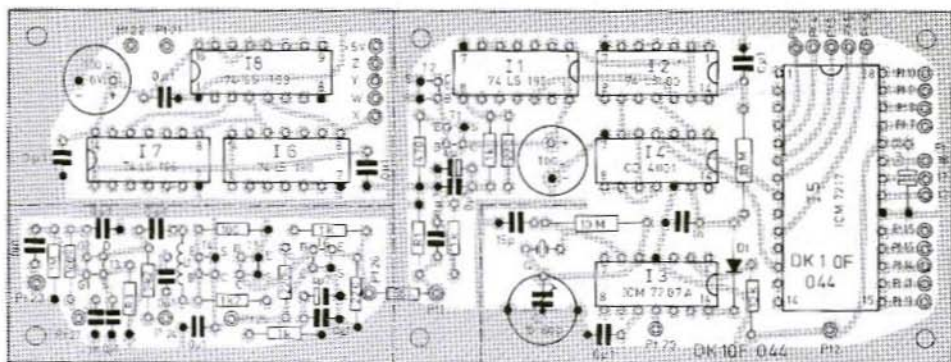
Component locations on the double-coated PC-board DK 1 OF 044, with through-contacts
